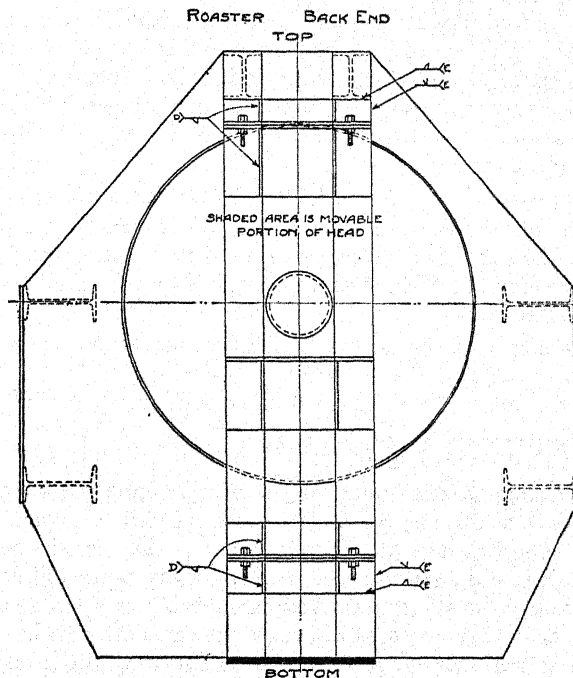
Details, rear end, arc welded ore roaster.
